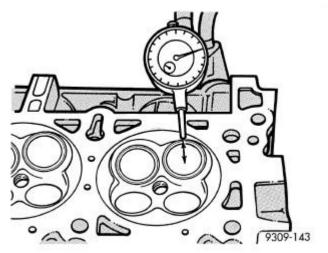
Measuring Valve Guide Wear Courtesy of CHRYSLER LLC
